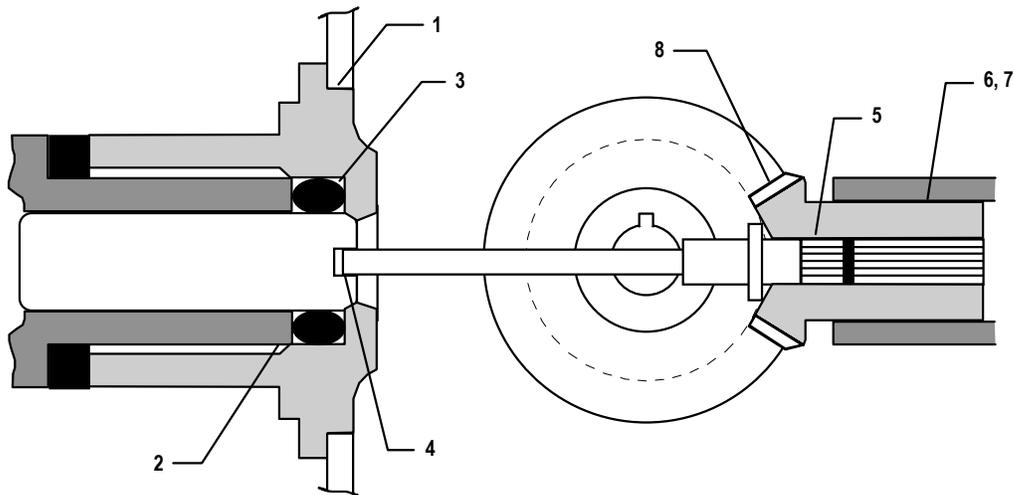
FUEL PUMP DRIVE FITS AND LIMITS
